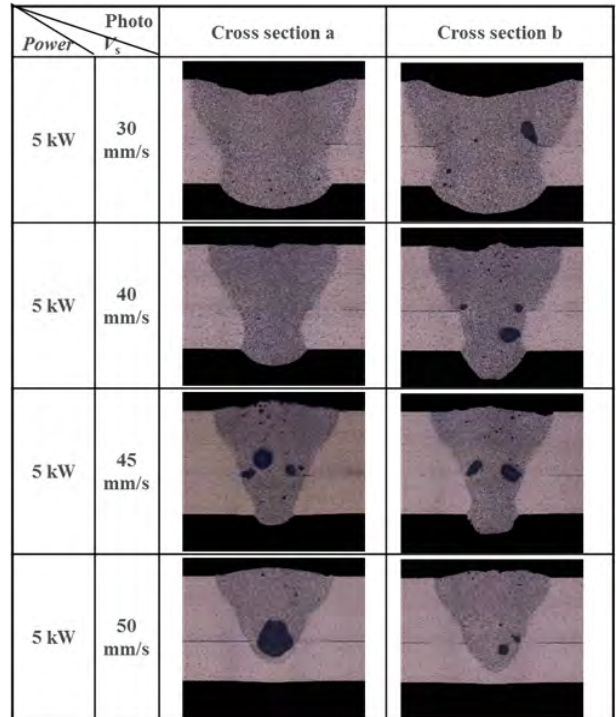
Cross-sectional images of AA6451-AA6014 laser lap dissimilar welding by change welding speed at 5 kW laser power
